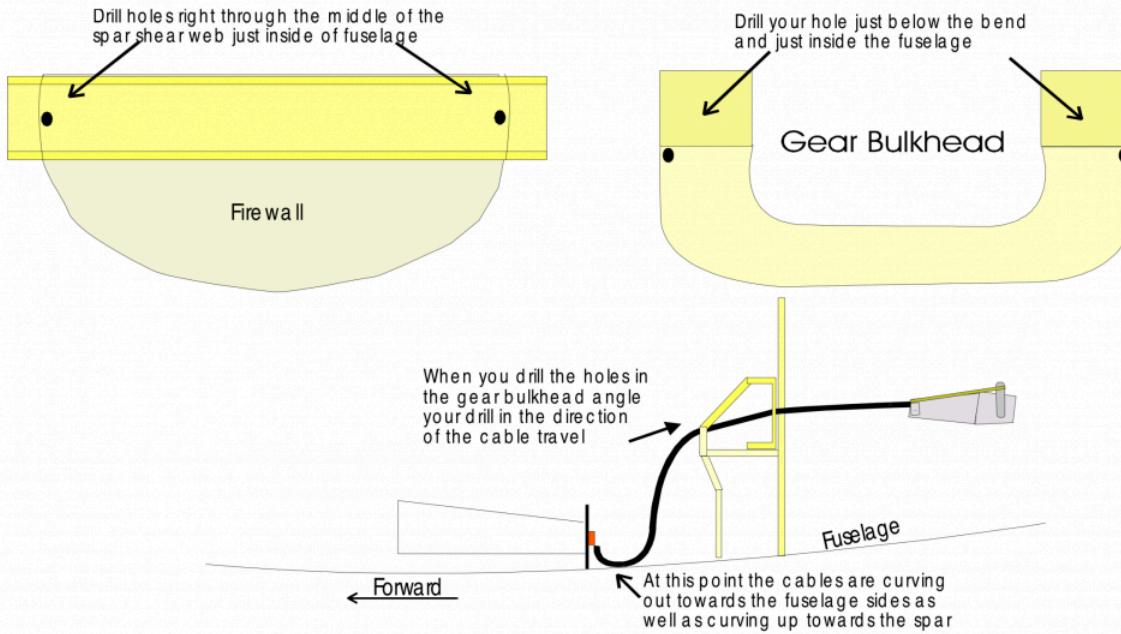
Aileron Cable Routing (Retractable Gear)
